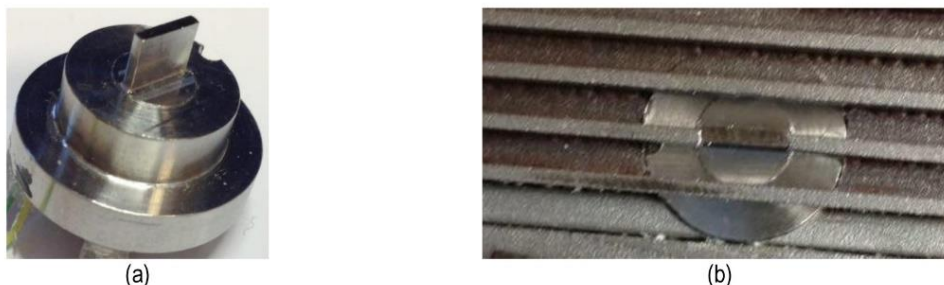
(a) RFS sensor (b) close-up of the stator plate with the RFS installed in the plate with BEL=5.59 km/rev
